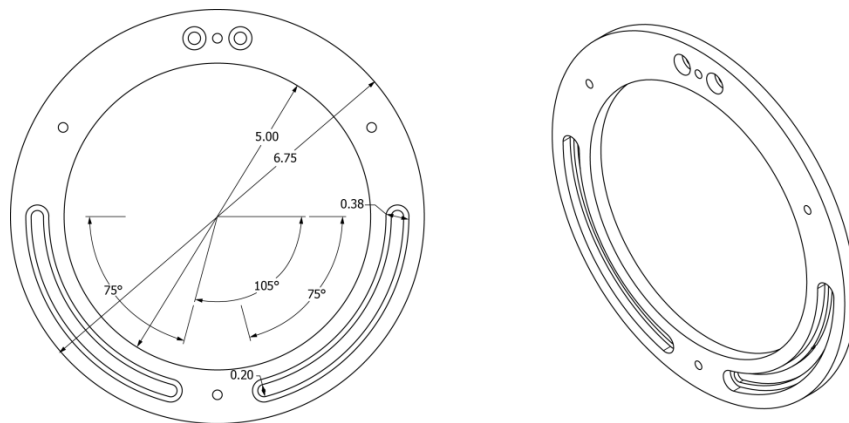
Machine drawing of the halo for head fixation. Dimensions are in inches.
